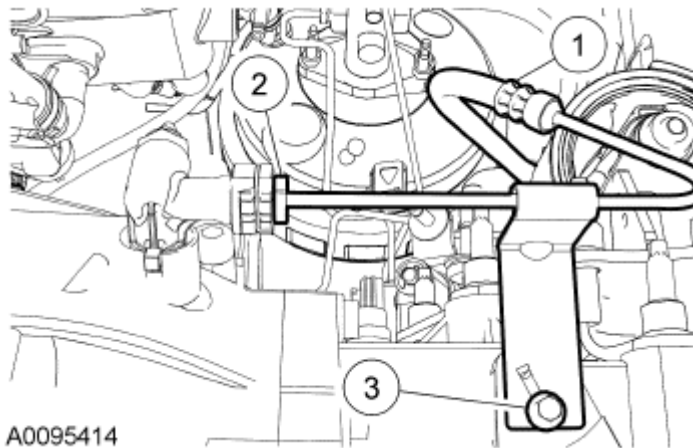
Identifying Clutch Hydraulic Line And Clutch Hydraulic Line Bracket-To-Transaxle Bolt
